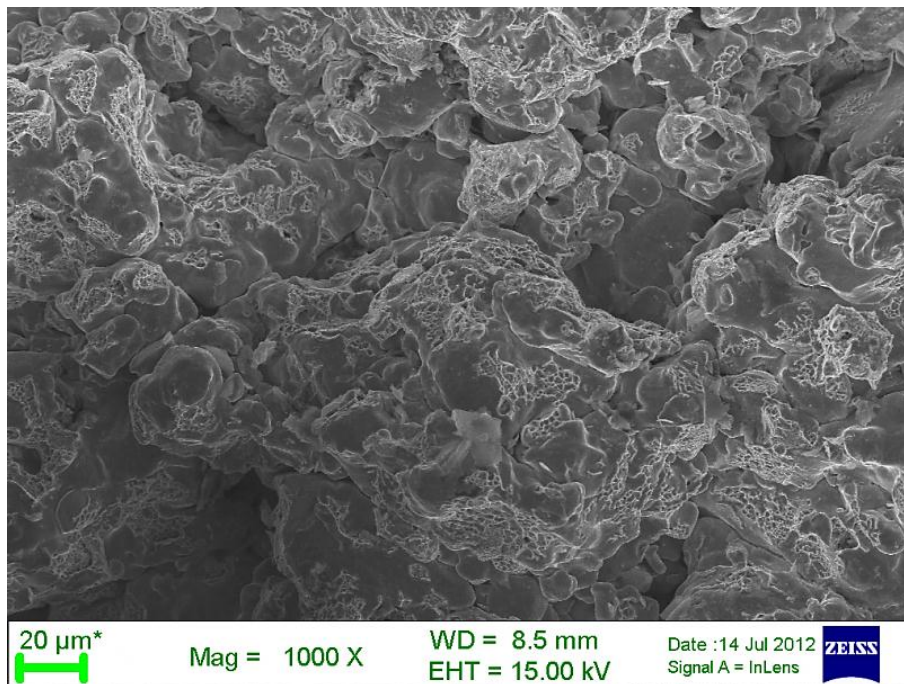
General appearance of the fracture surface of specimen (KS4) heated to 900°C in N₂/10%H₂.
